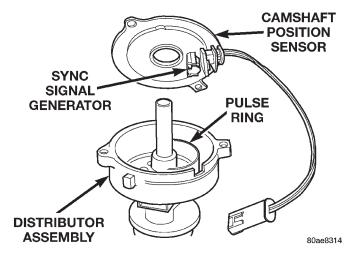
Distributor and Camshaft Position Sensor-Typical
